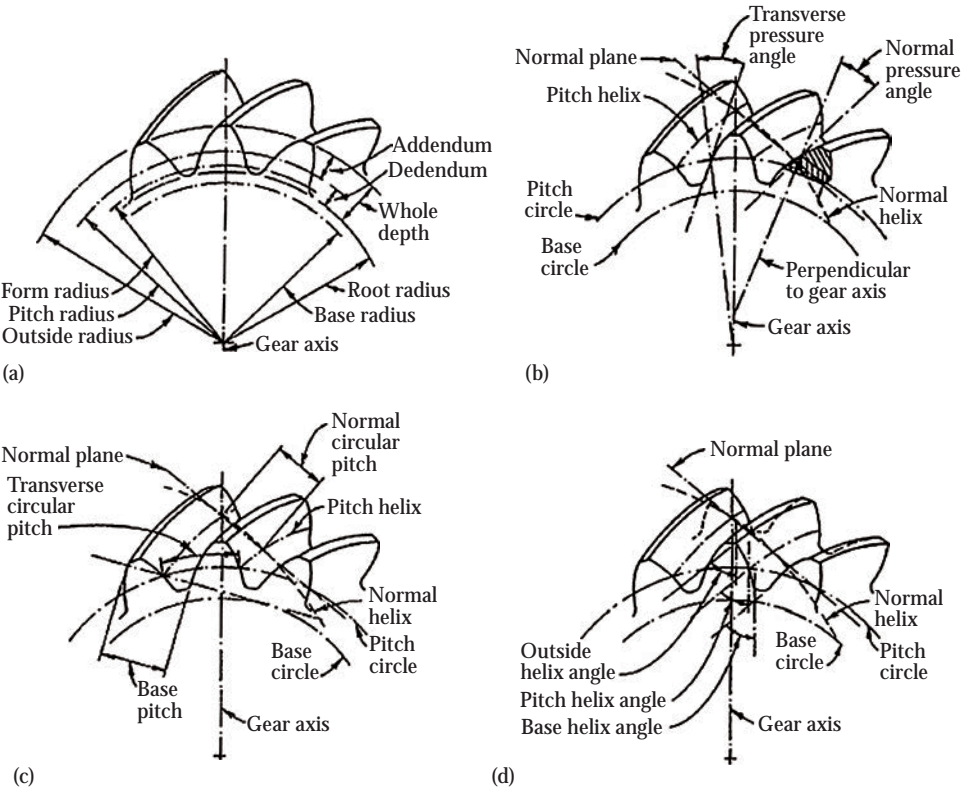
Helical gear nomenclature. (a) Radial dimensions of a gear, (b) pressure angles of a gear, (c) gear pitches, and (d) helix angles of a gear.
